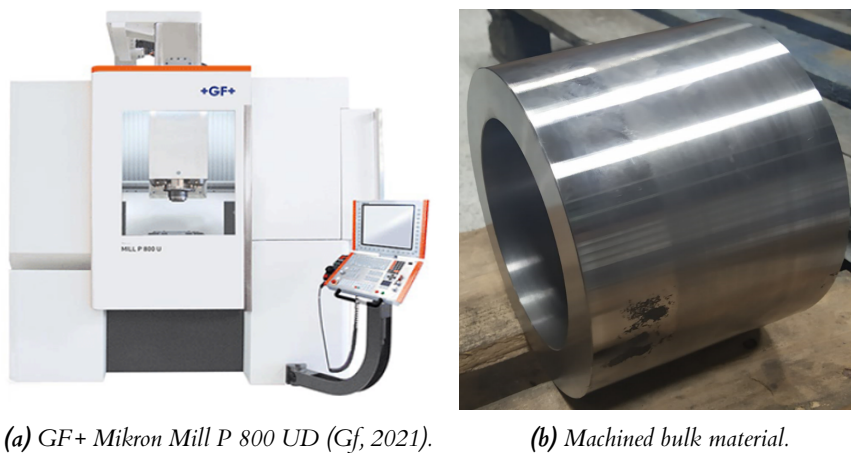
5-axis machining center and the bulk material for the workpiece manufacturing.
